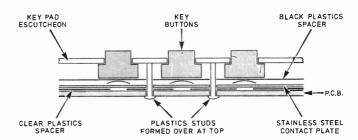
A guide to the basic construction of the Sinclair 0801 keyboard assembly
